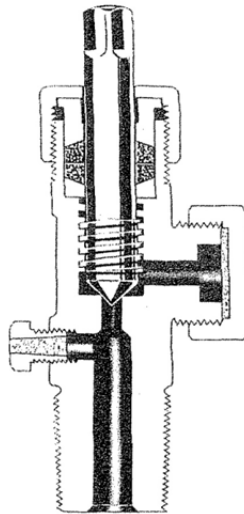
One Typical Style of a Cylinder Valve (Other designs may also be in use)
